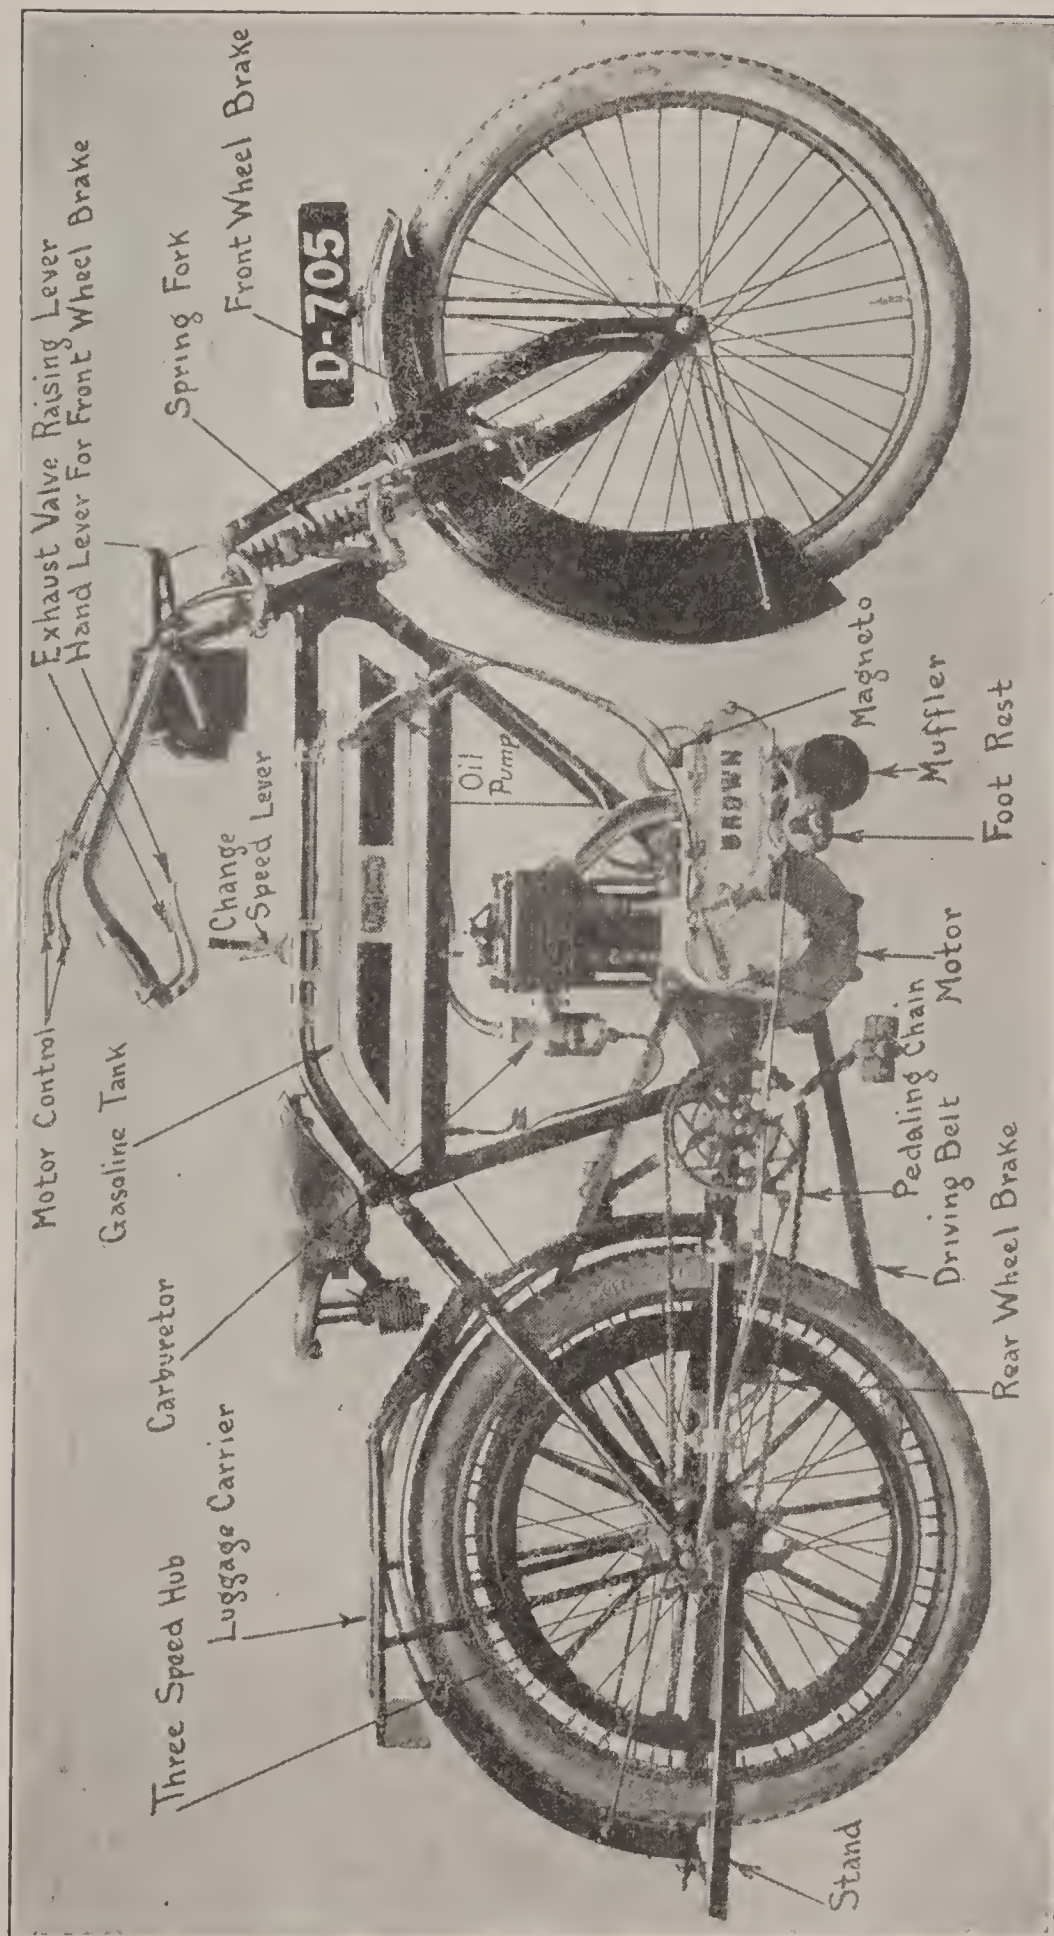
The Brown (English) Motorcycle With Important Parts Clearly Indicated.
